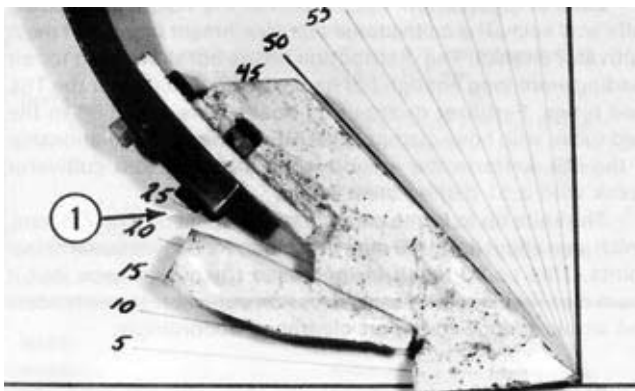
JAD Knife Mounted on a Cultivator Shank: (1) Limited Access to the Lower Support Bracket Bolt Hole.
